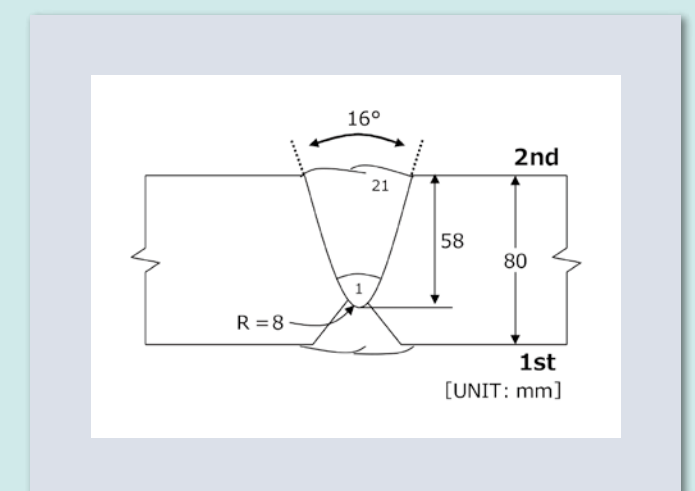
Groove configuration and pass sequences for the 2nd side welding
